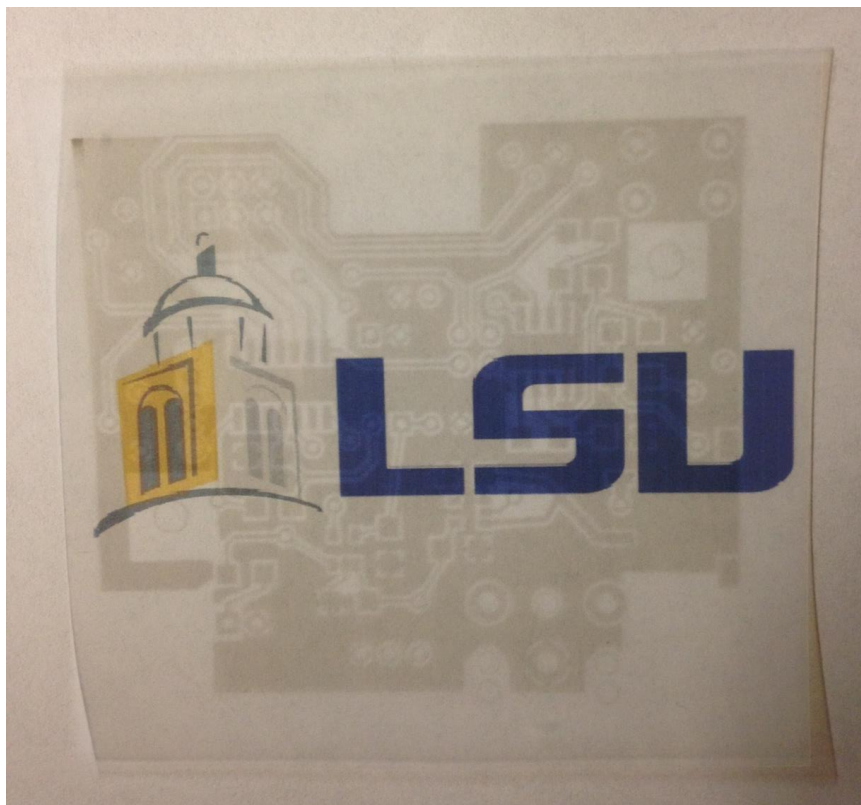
InkjetPCB fabricated using carbon nanotube inkjet printing on a transparency film.
